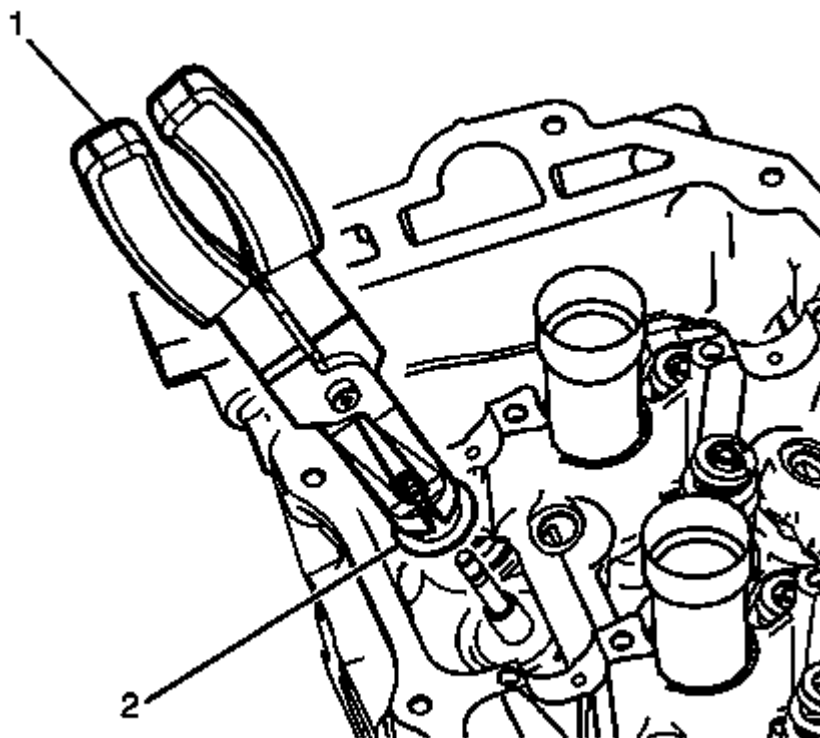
View Of EN 46110 Valve Spring Compressor Nut
